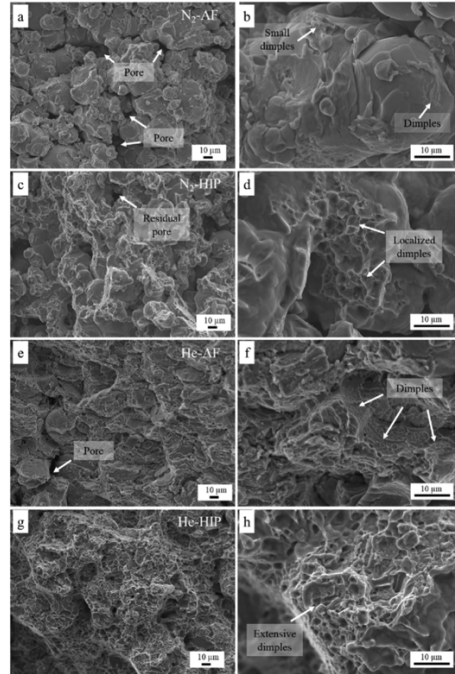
The examination of the fracture surface of Ti-6Al-4V samples manufactured using CS. In the right column, a smaller magnification is used [105].
